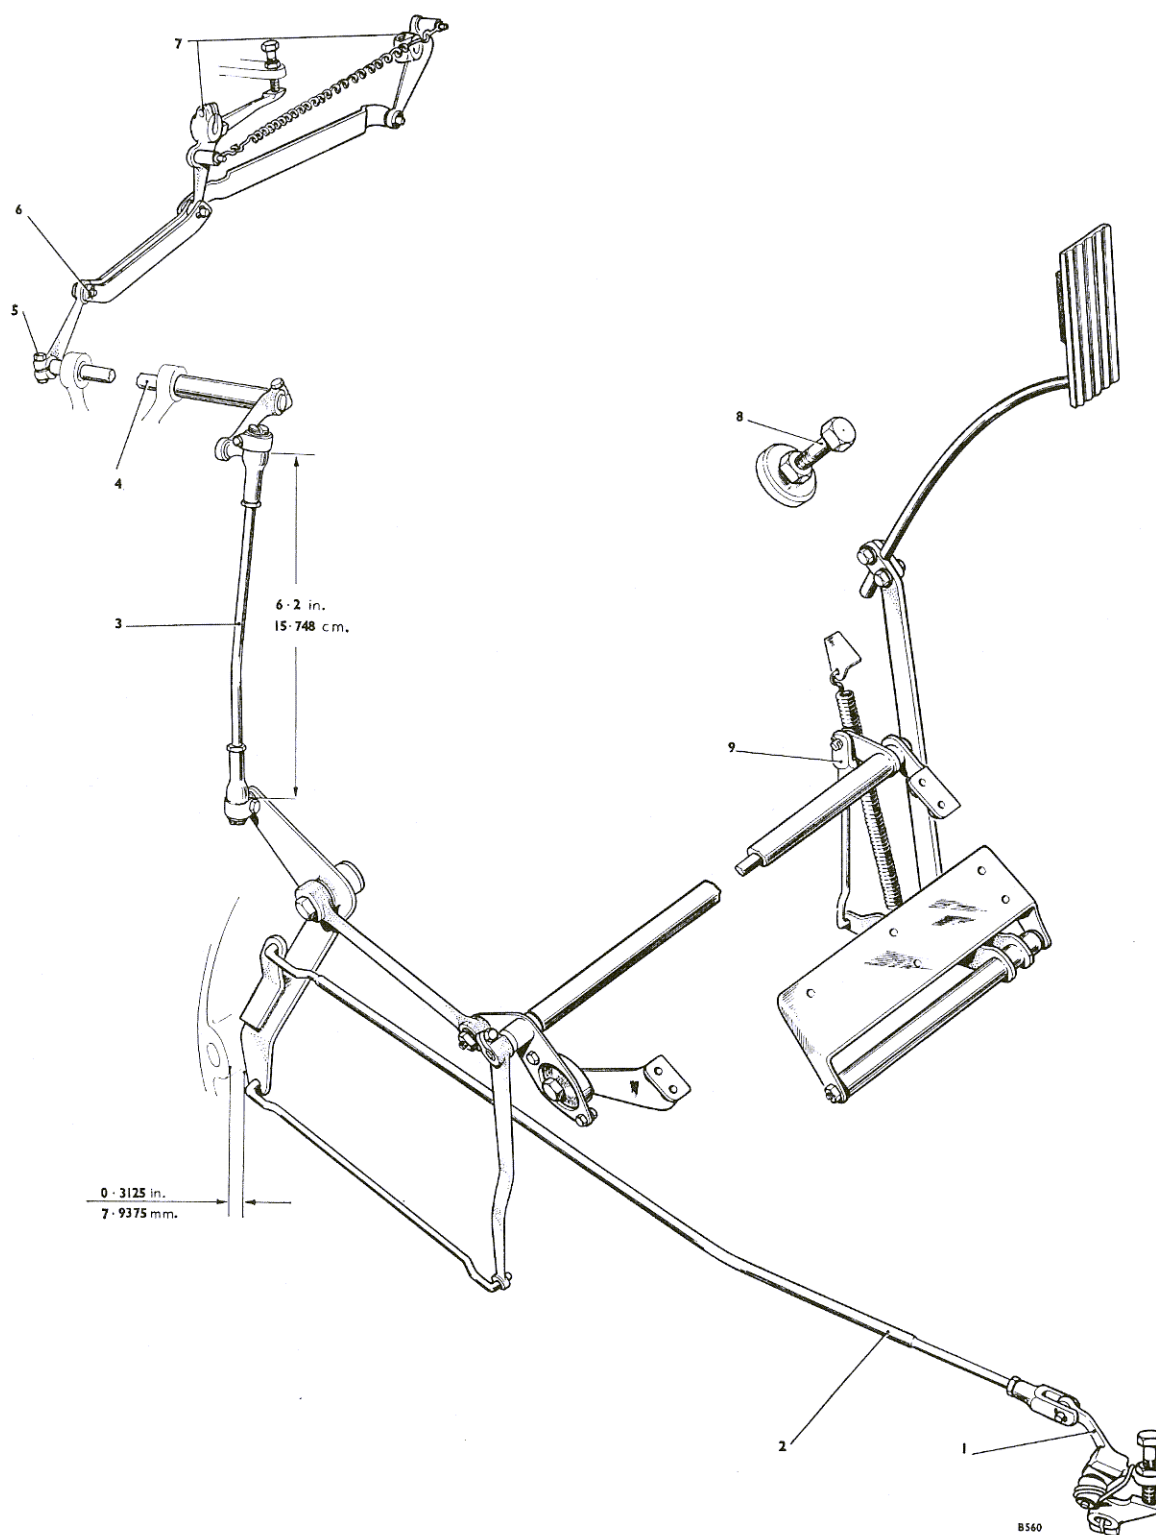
Throttle and T.V. control linkage — R.H. drive cars
